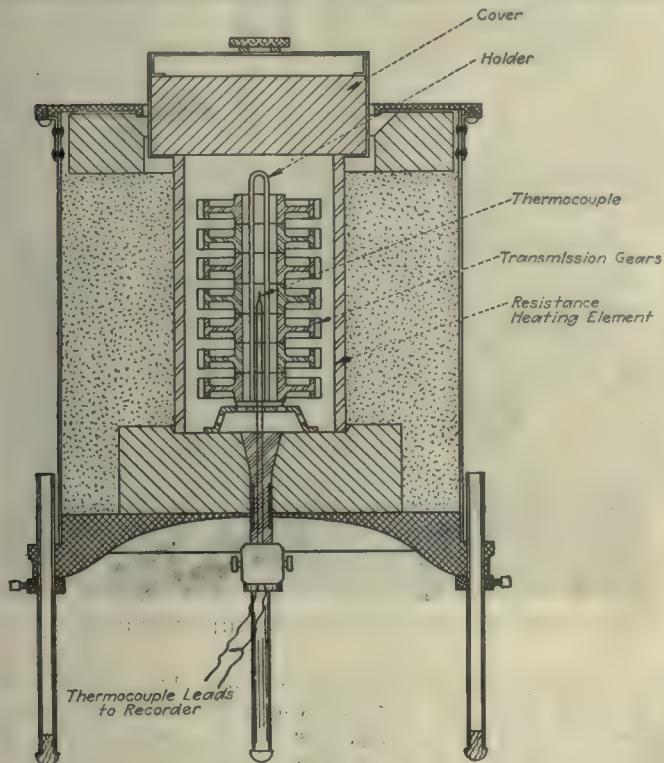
FURNACE FOR AUTOMOBILE GEARS
